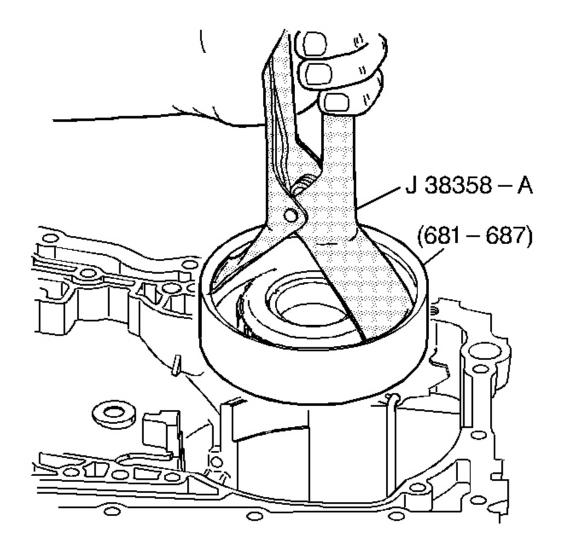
Removing 1-2 Support Drum Out Of The Case Using J 38358-A Courtesy of GENERAL MOTORS CORP.
